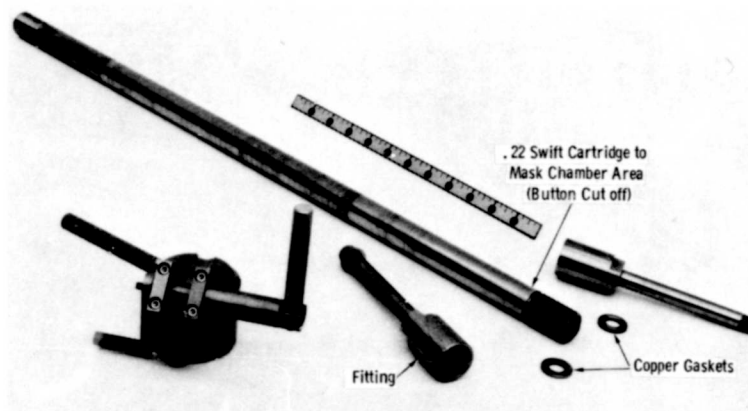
22 Cal Gun Barrel with Threads for Gas Fittings or Universal Receiver
